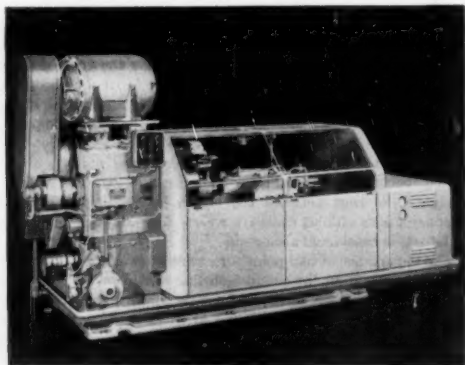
LATHE SHOWING PUSH-BUTTON CONTROL AND COMPLETE COOLANT ENCLOSURE
